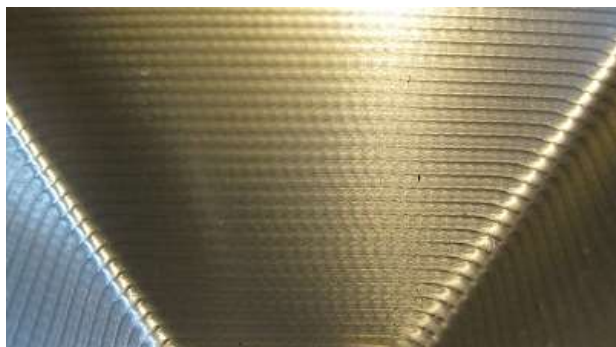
Surface roughness of formed part at tool rotation speed of 1000 RPM
